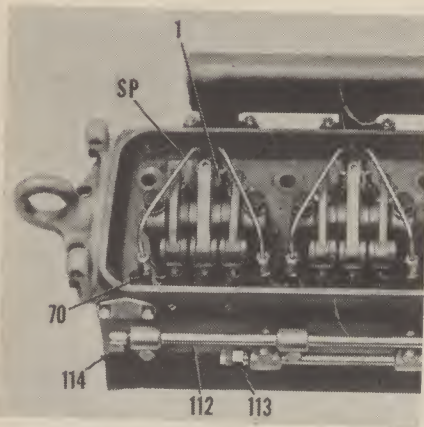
A—Fuel manifold assembly installation. Refer to Fig. 0544A for legend.
